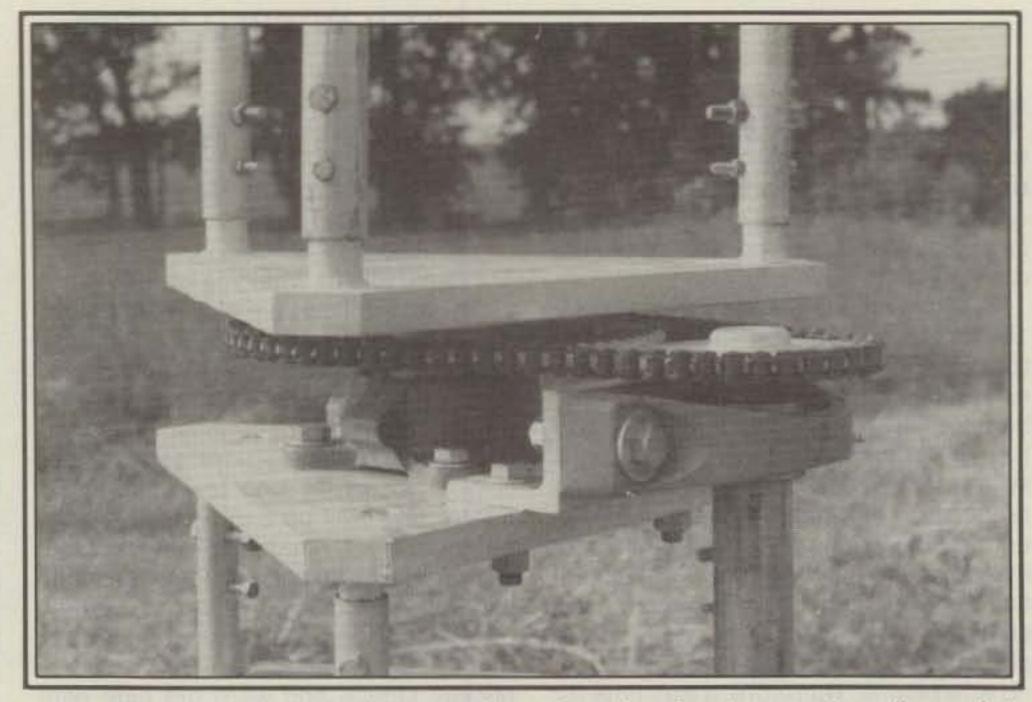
This view shows the base top plate, thrust bearing, large and small sprocket, drive rod, and bottom plate for the rotating tower.
